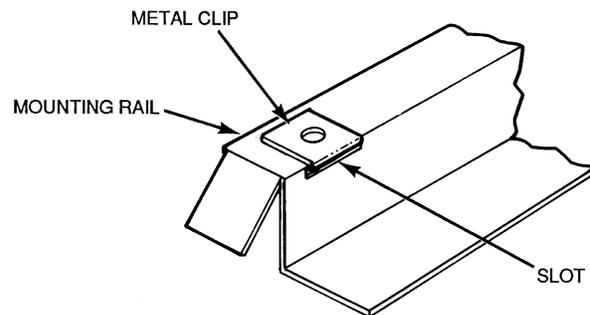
Remove Metal Clip on GE Metal Sleeve
